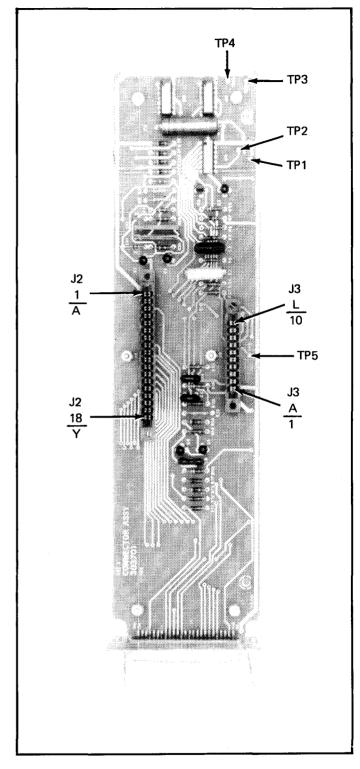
MOTHER BOARD A1 CONNECTOR ASSEMBLY PCB
